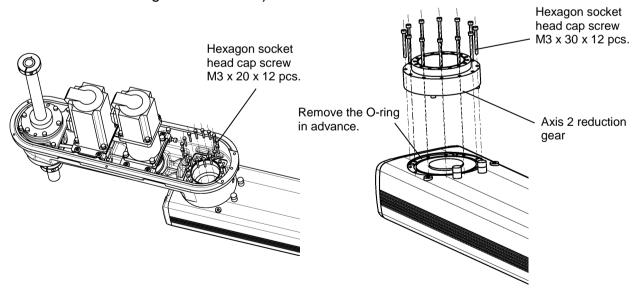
Dismounting axis 2 reduction gear (KHL-500, KHL-600, KHL-700)
